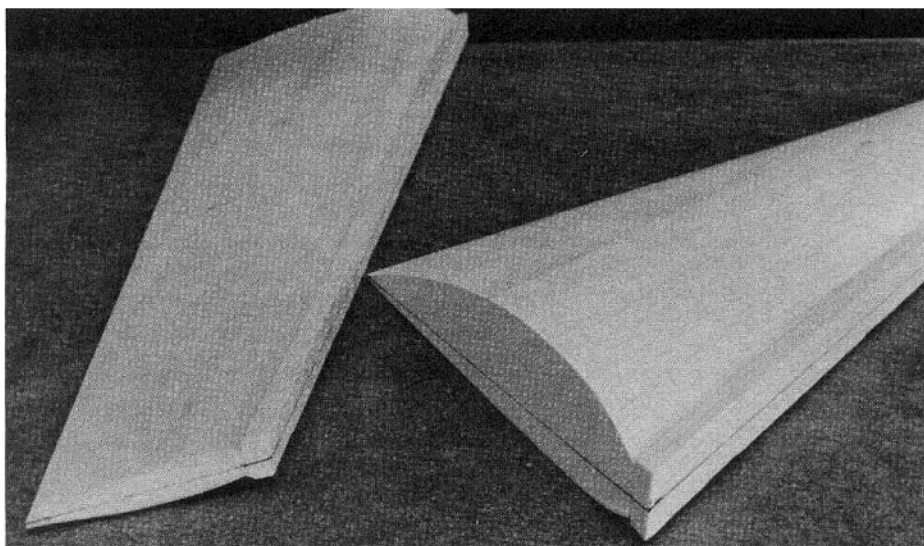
The Great American Foam Machine is set for a 6° miter and the dihedral angle is cut into the wing core block before the core is cut.
